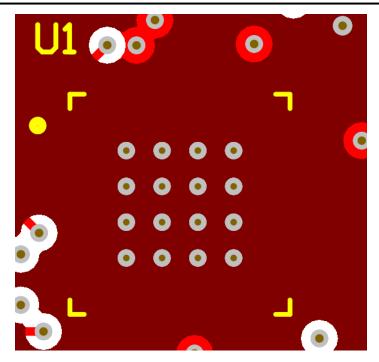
PCB Layout Example for CDCDB803, GND Layer
